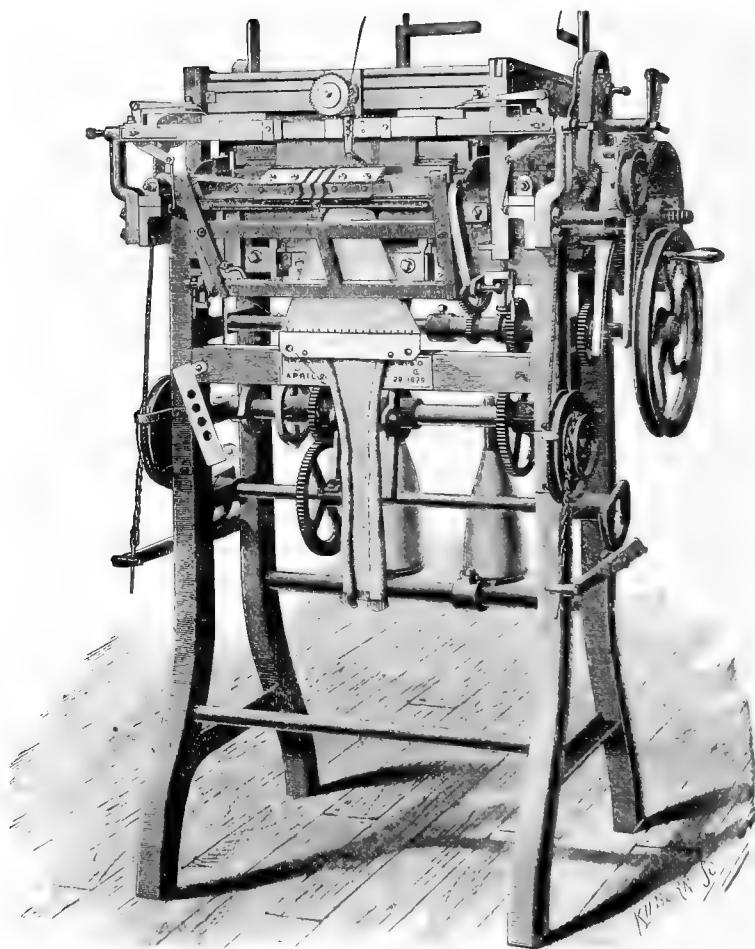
The Aiken full-fashioned footer; The Abel Machine Company.
